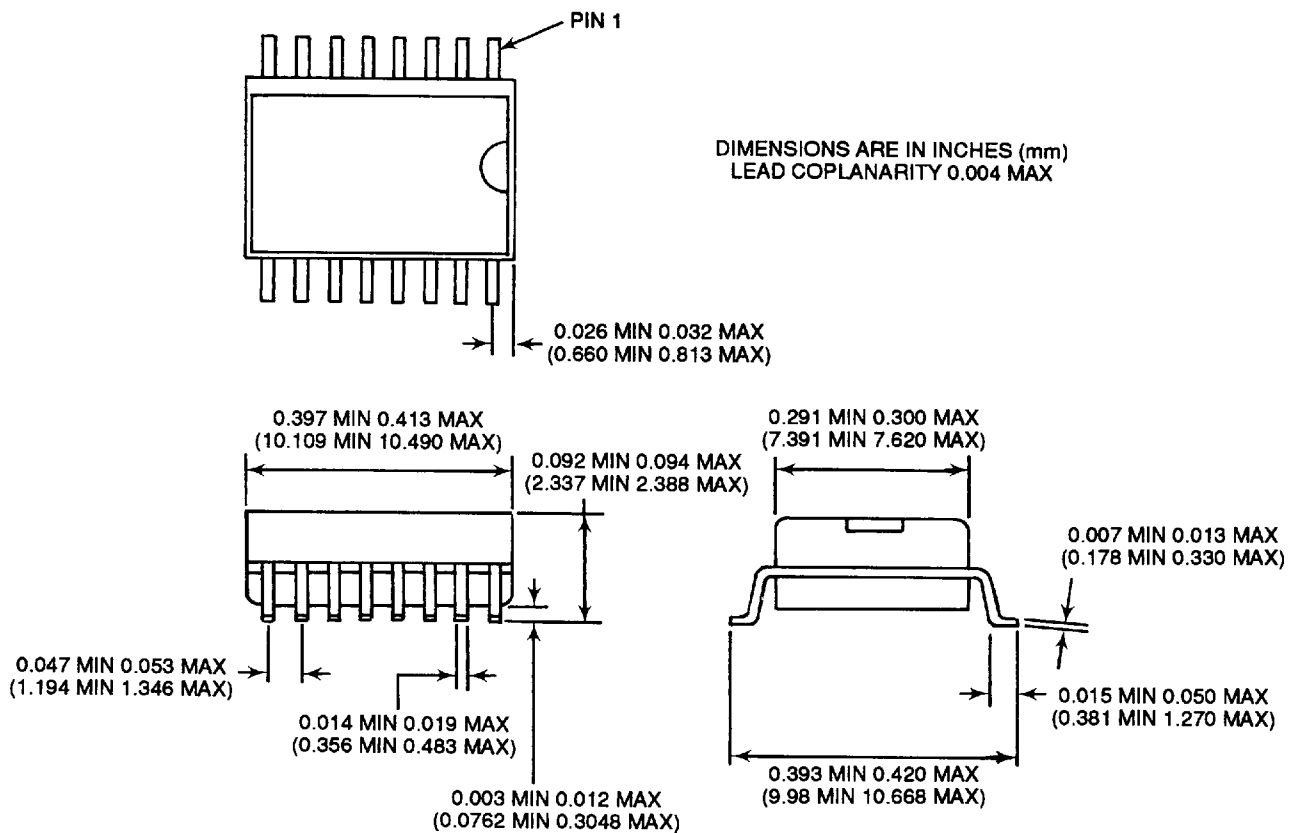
DD-03182 SURFACE MOUNT (SOIC) PACKAGE MECHANICAL OUTLINE
